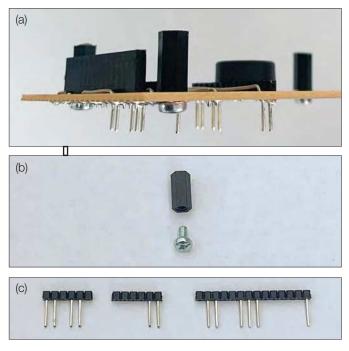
(a) one of the four mounting pillars used to support the TFT module; (b) nylon threaded stand off (12mm, M3) with 6mm M3 screw; and (c) the three modified jumpers that connect the TFT adaptor to the *MKC*.
